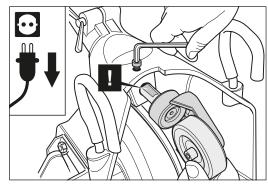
Release the screw and pull the complete rear wheel assembly out of the machine housing.
